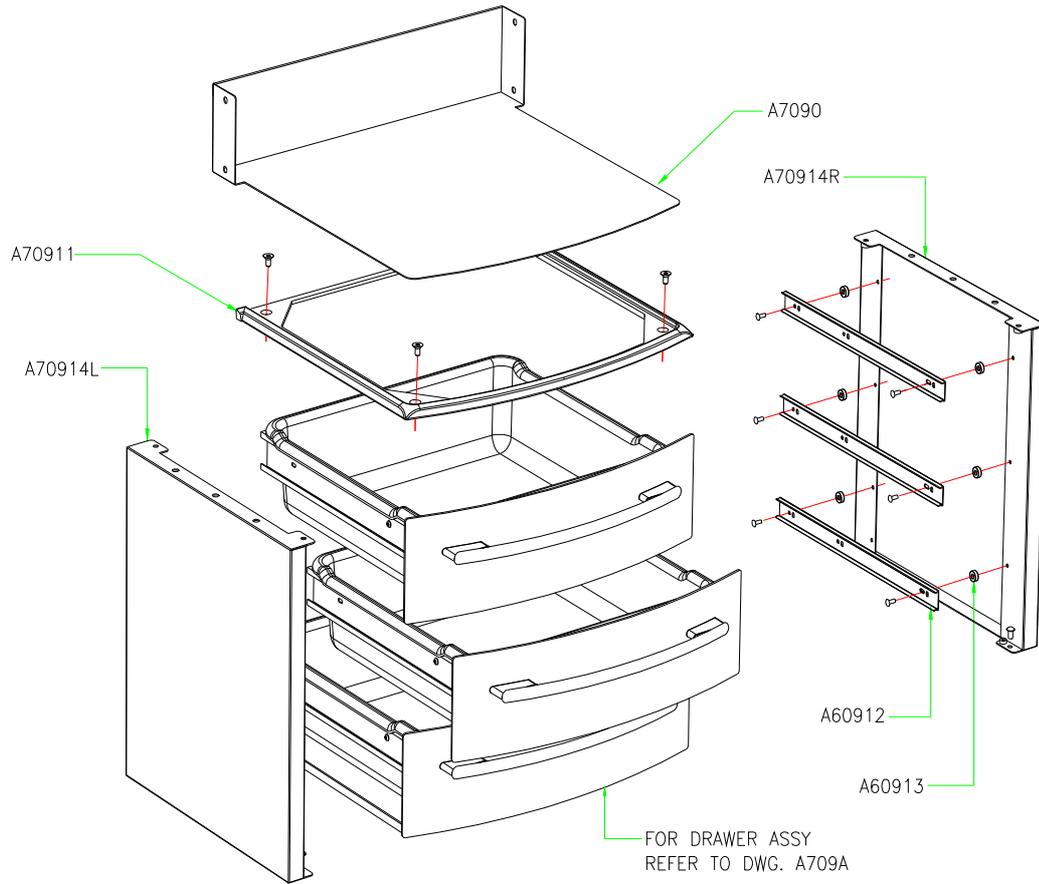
A709 - DRAWER ASSEMBLY / 3-SET
